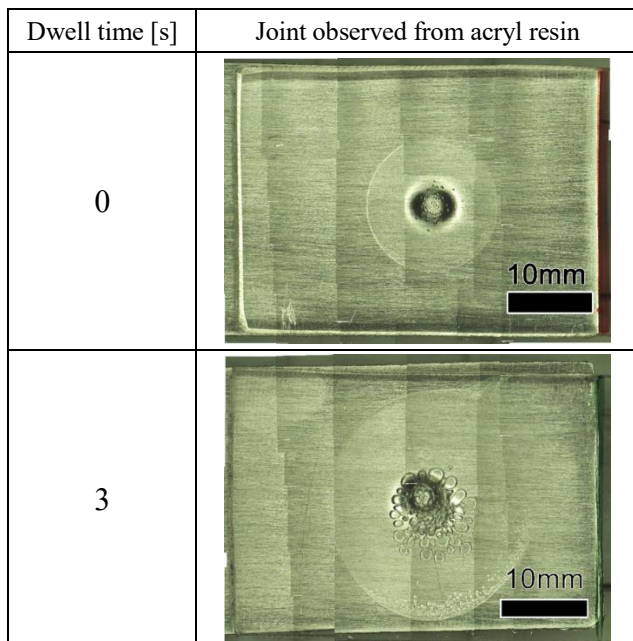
Macroscopic appearances of joints welded at 0 s and 3 s.
